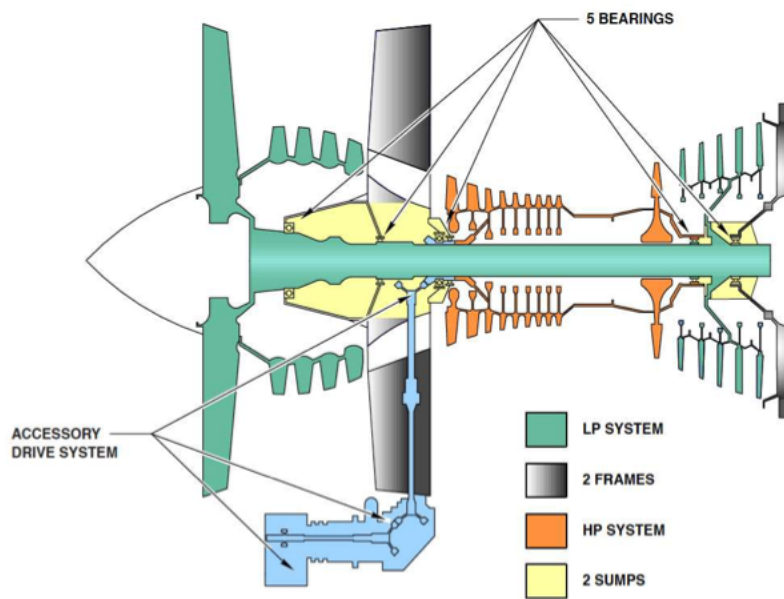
General schematic of the engine, highlighting the main components and bearings.
